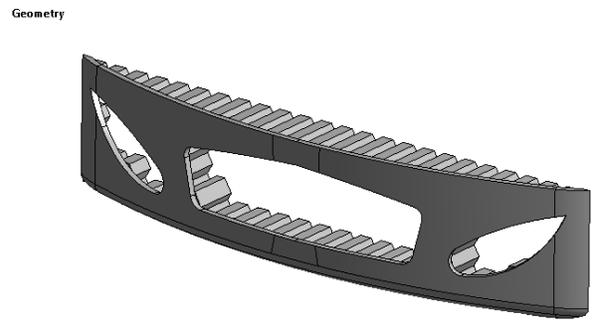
Another view of Geometry of modified front bumper with honeycomb structure
